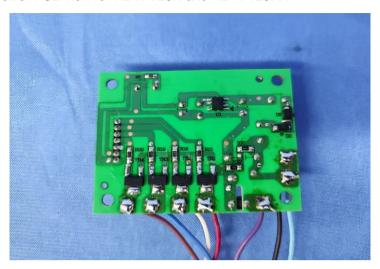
Display and control PCB view for NDTFT23R and NDTFT23RH
